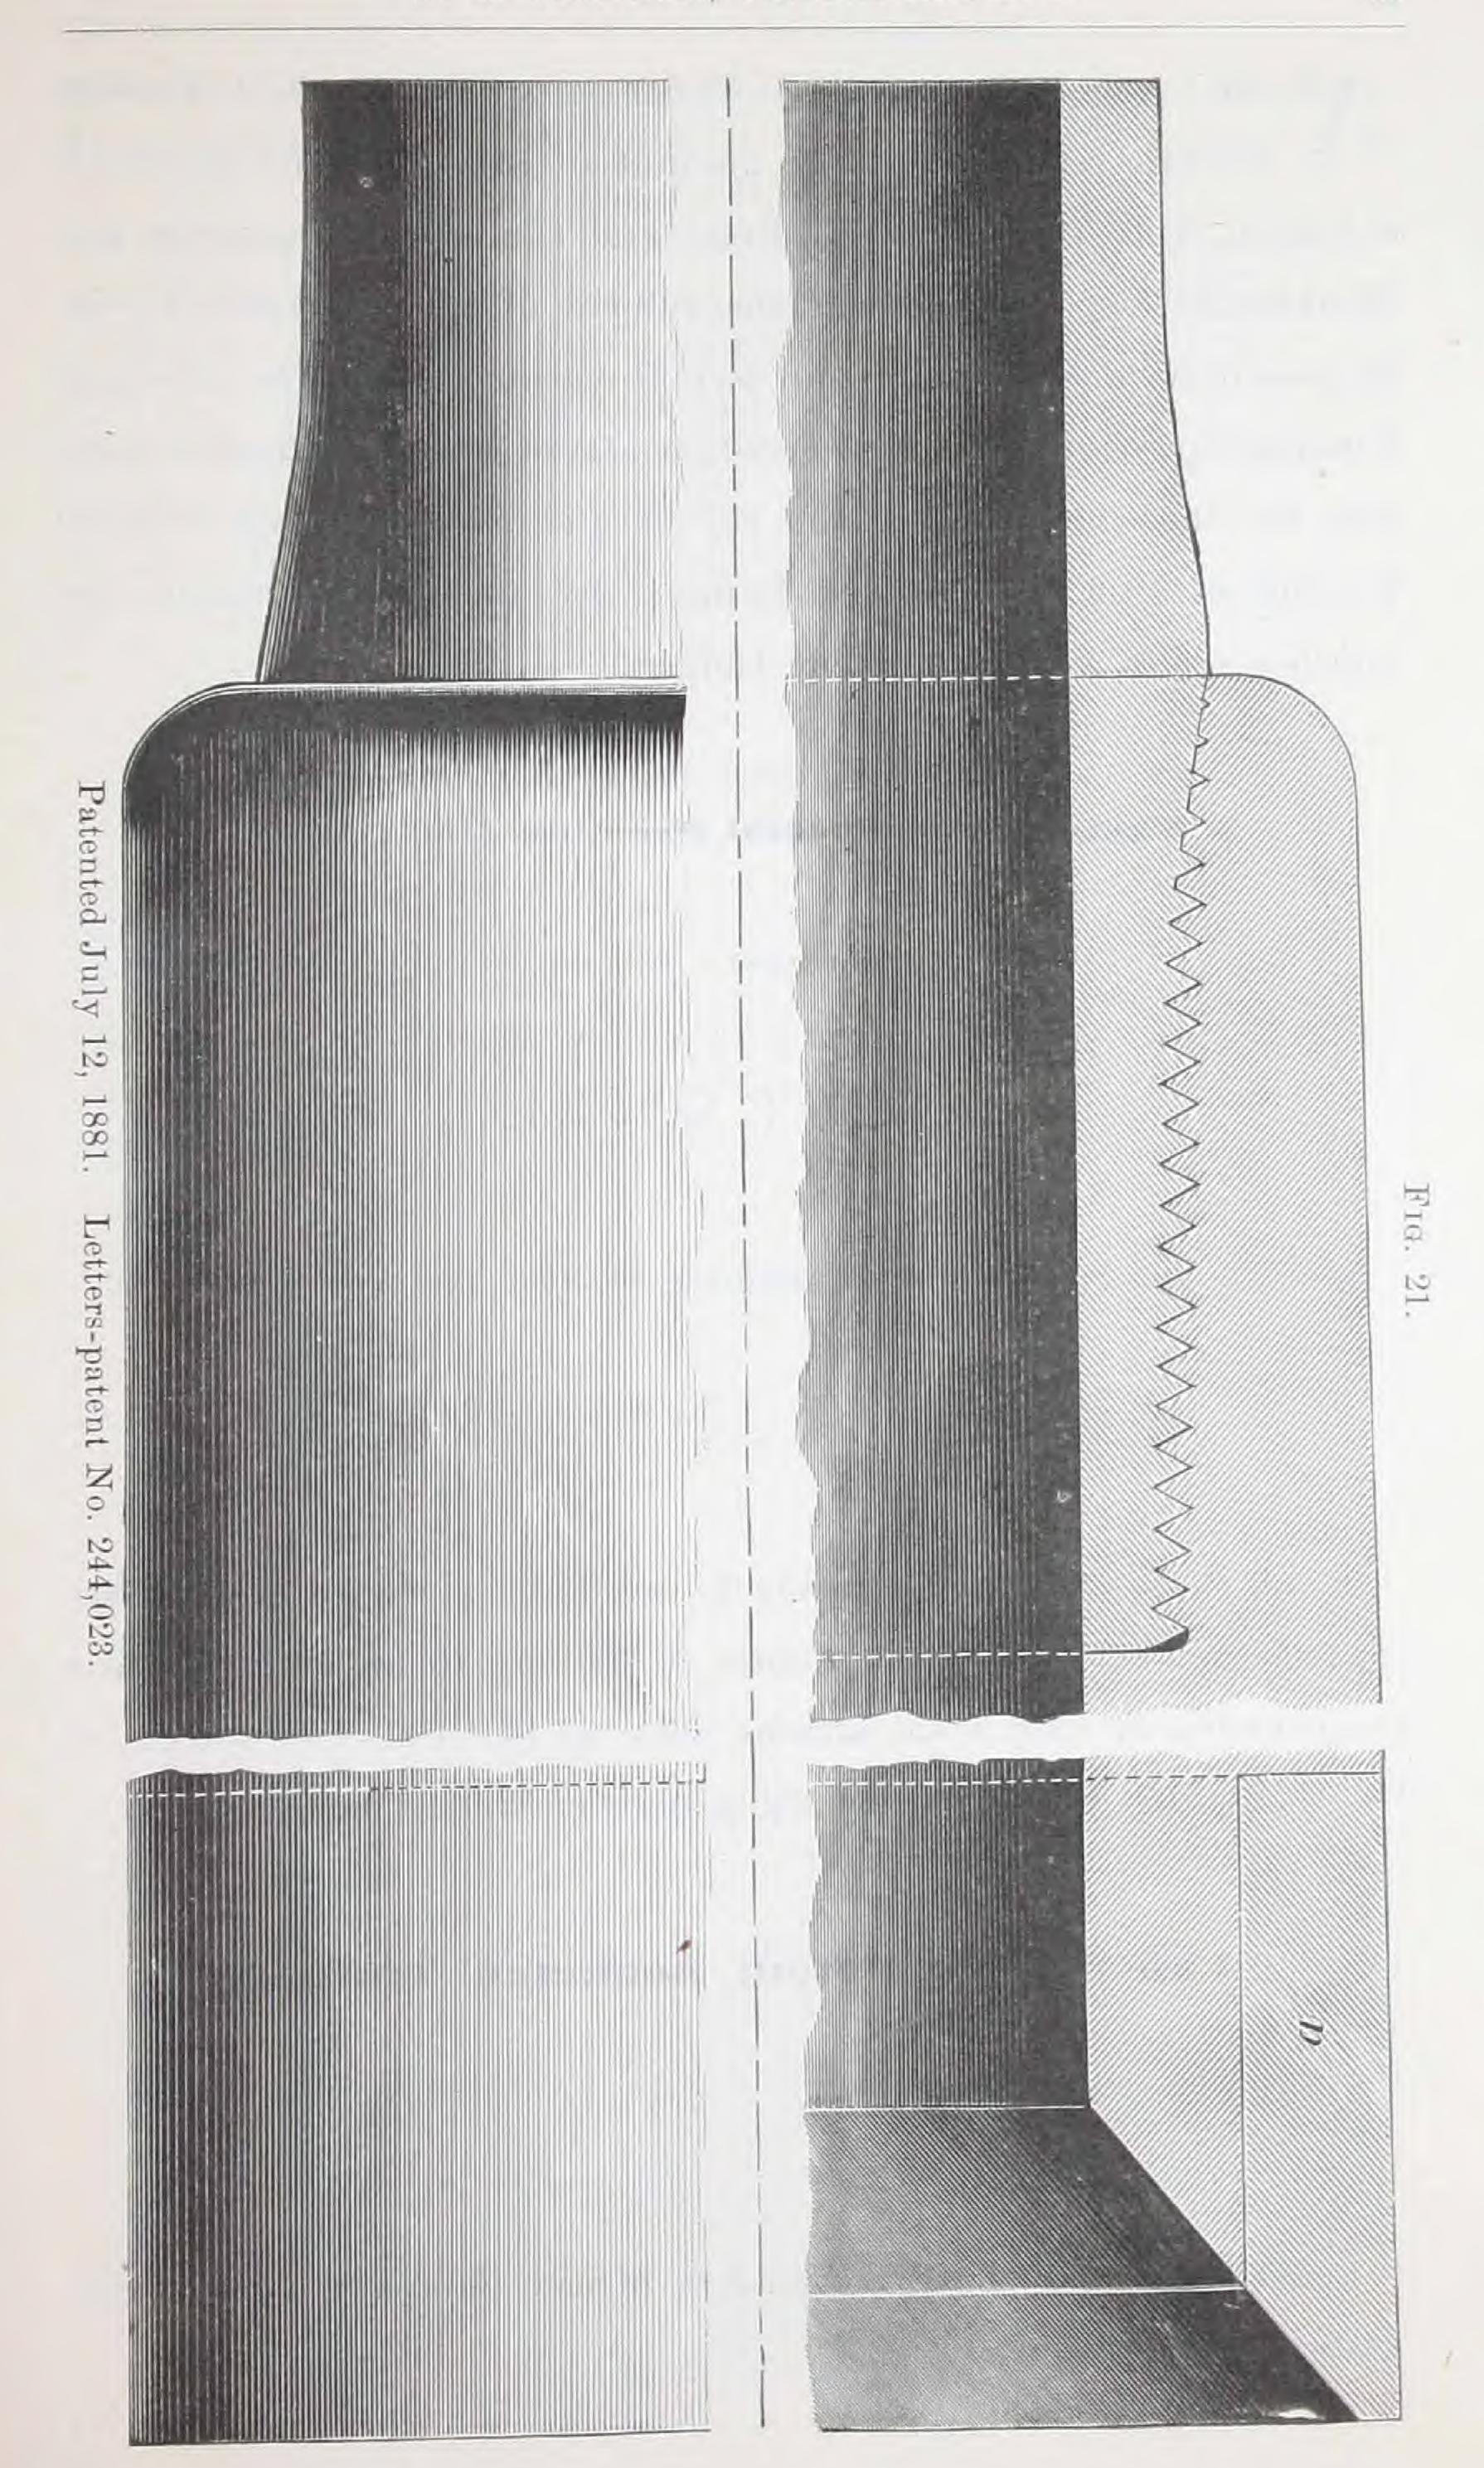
represents an improved Drive-Shoe, made of wrought-iron forging, with a steel ring shrunk on its lower end to form its cutting-edge, the outside diameter at the lowest part being larger than the outside of the sockets connecting the sections of drive-pipe. The upper inside of the shoe is tapped with the Allison Patent Vanishing Thread, and is screwed on a length of drive-pipe, the end of which is upset, and has a corresponding thread; the lower end of the pipe rests on a shoulder in the shoe of the same width as the thickness of the pipe, thus preventing the thread being injured by the force of the blows used in driving. The inside of the Drive-Shoe is of the same diameter as the inside of the drive-pipe.
